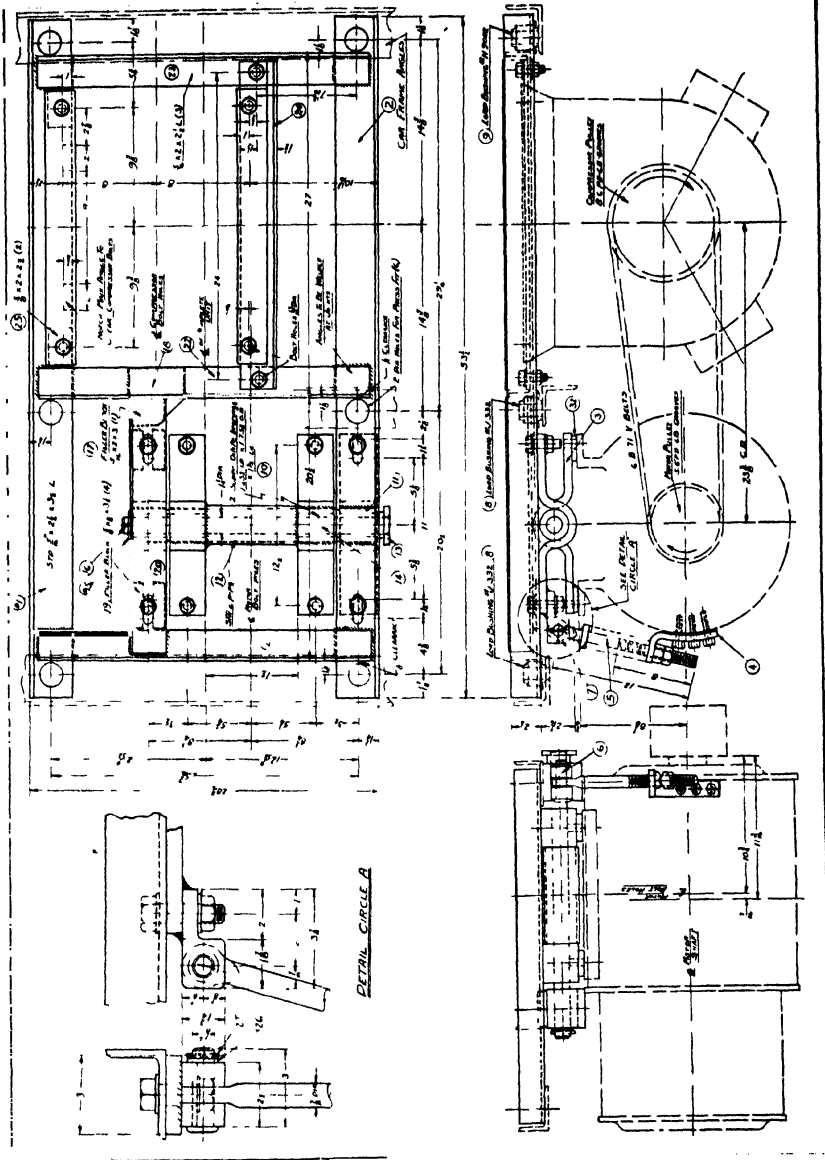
General assembly of arc welded compressor suspension.
